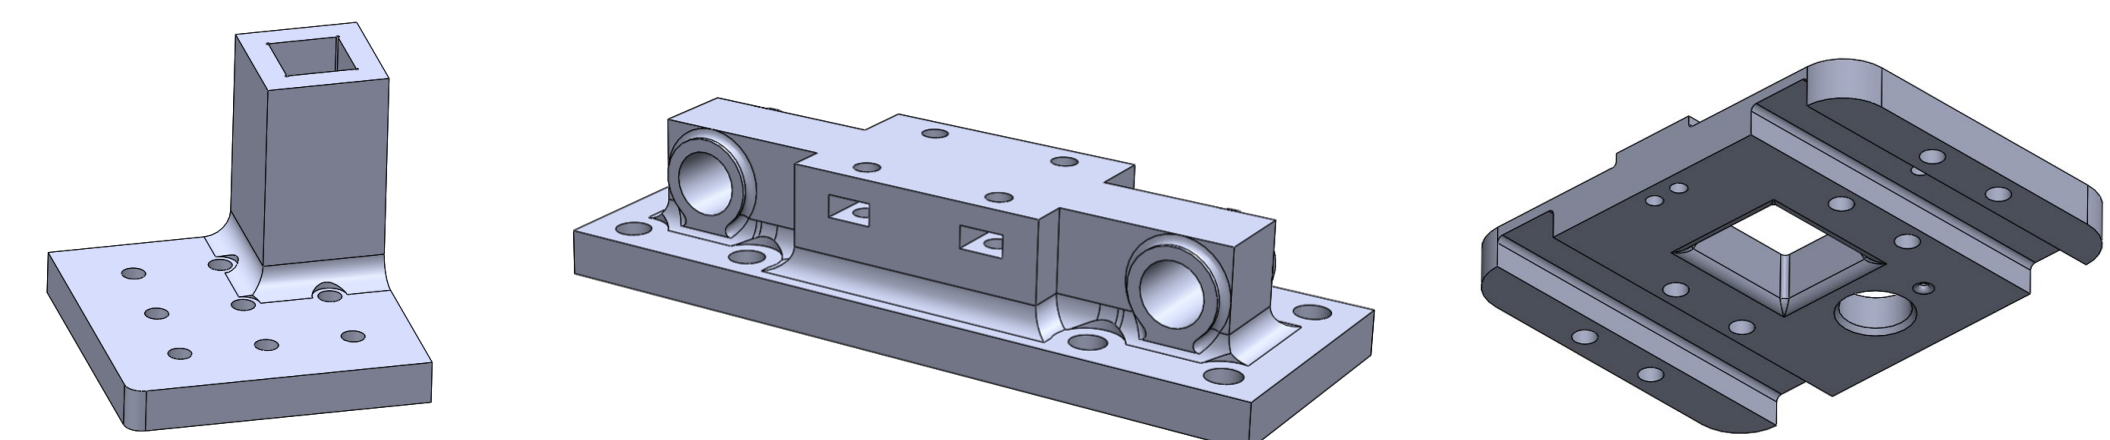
CAD models of some of the parts that were 3D printed. Left: Mounting foot. Center: Motor mount/guide rod holder. Right: Motion tracking camera mount/bearing mount.
